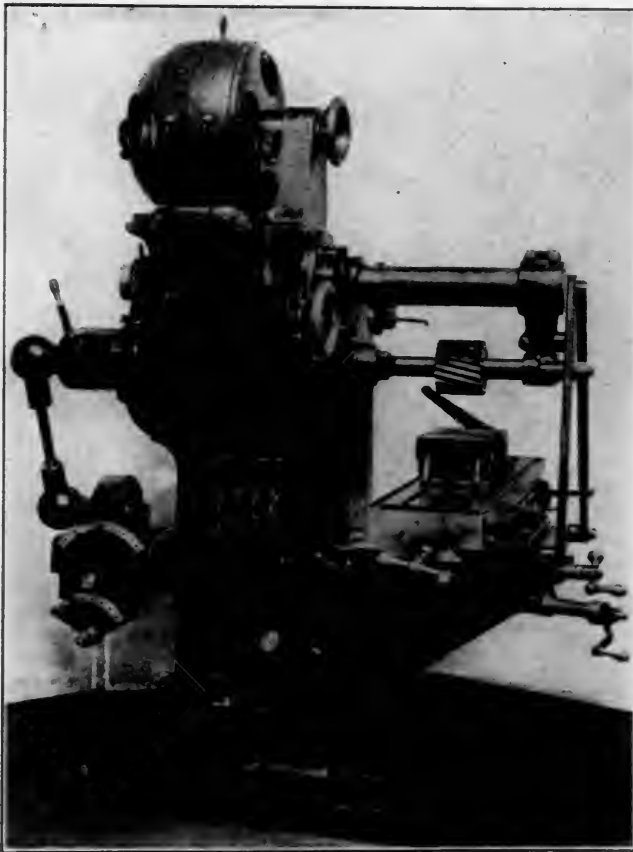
VARIABLE-SPEED DRIVE FOR A UNIVERSAL MILLING MACHINE, ALL PARTS ENCLOSED—CINCINNATI MILLING MACHINE COMPANY—CROCKER-WHEELER MOTOR.
